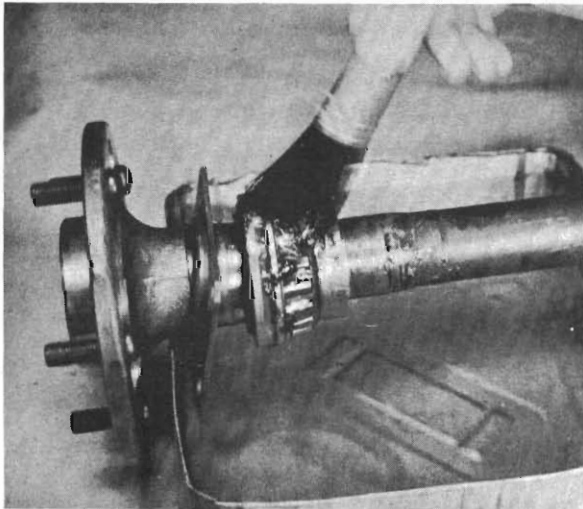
Cleaning bearing cone and seal on the shaft.
